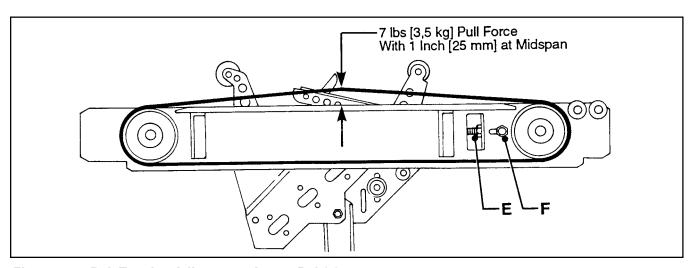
Belt Tension Adjustment, Lower Belt(s)
